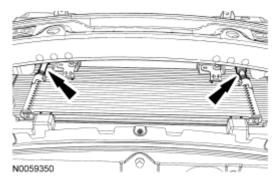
Locating Subframe Support Brackets, Nuts & Bolts Courtesy of FORD MOTOR CO.
